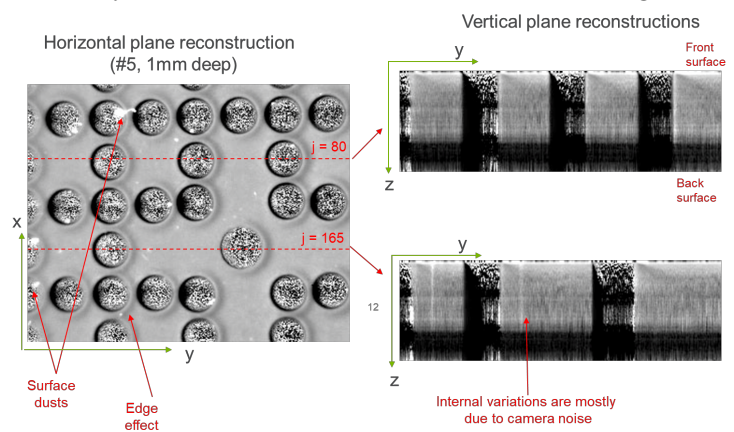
Zoomed-in reconstruction of IN718 nozzle plate (left). Horizontal plane reconstruction at 1 mm depth. Vertical cross-section plane reconstructions (right).
